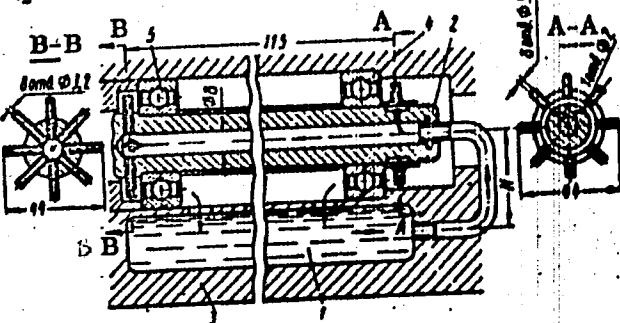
Cross section of the centrifugal supply of lubricant to rolling bearings.
